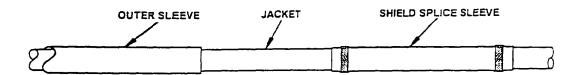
Single Shield Cable Repair with Mini-Seal Crimp Primary Splice (Sheet 2)
